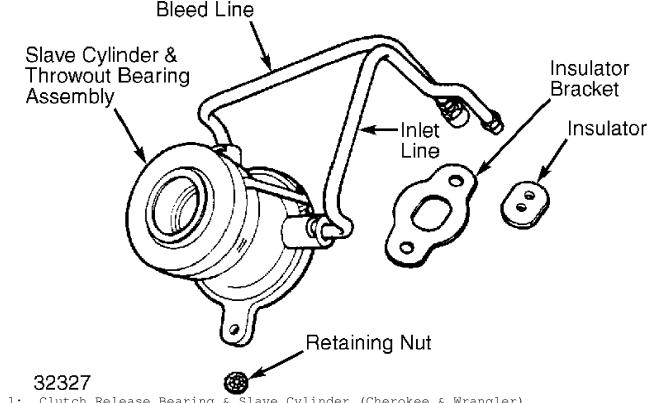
Clutch Release Bearing & Slave Cylinder (Cherokee & Wrangler) Courtesy of Chrysler Motors.
